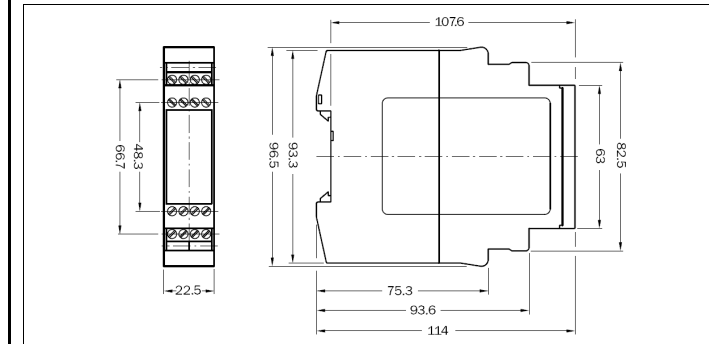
Dimensional drawing UE42-2HD with screw type terminals (mm)
